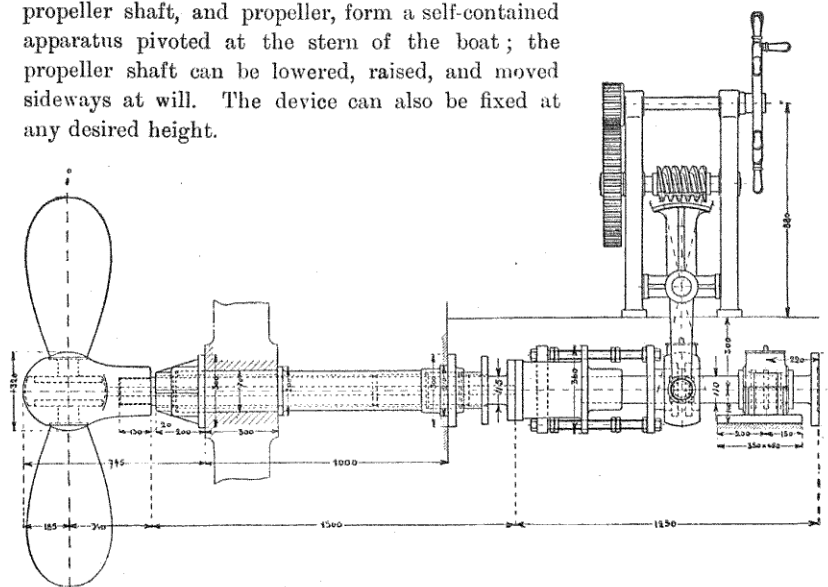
Reversible propeller manufactured by Karl Meissner, Hamburg, for large boats.
